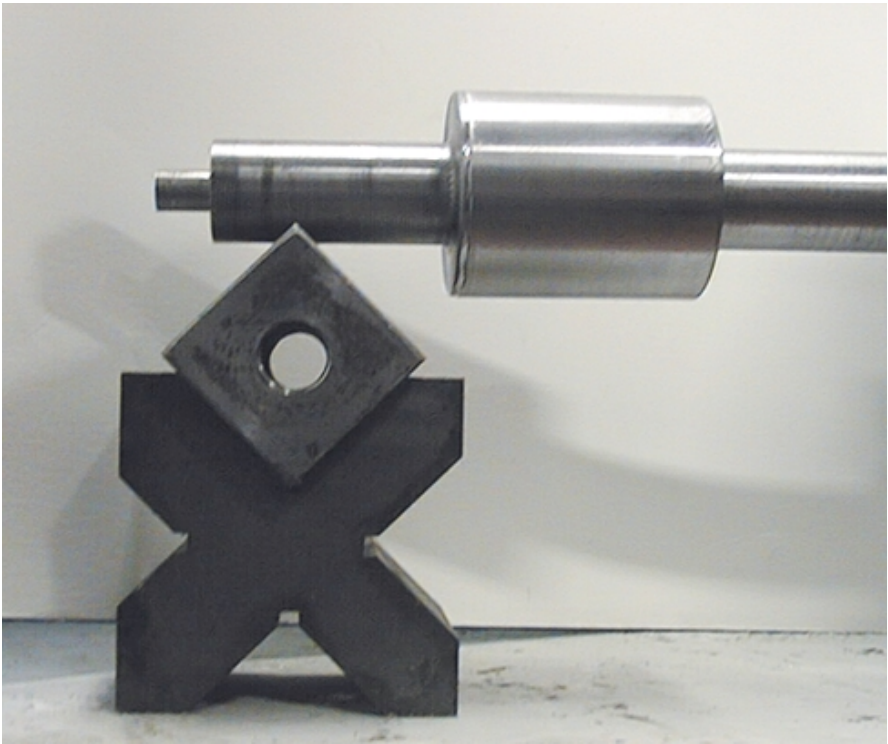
Extension of the crack in the test-rig shaft.
